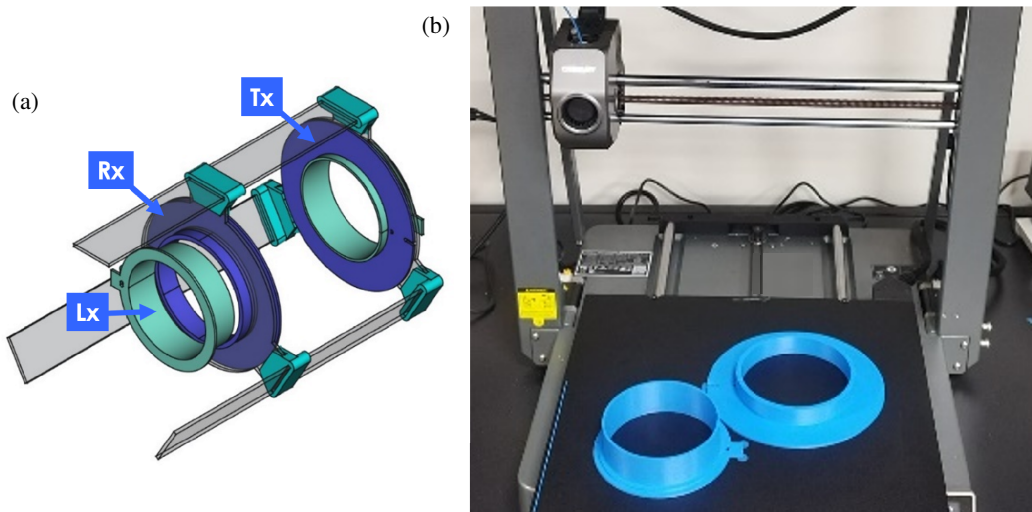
4-coil MCR-WPT (a) CAD design and (b) 3-D printing manufacturing.
